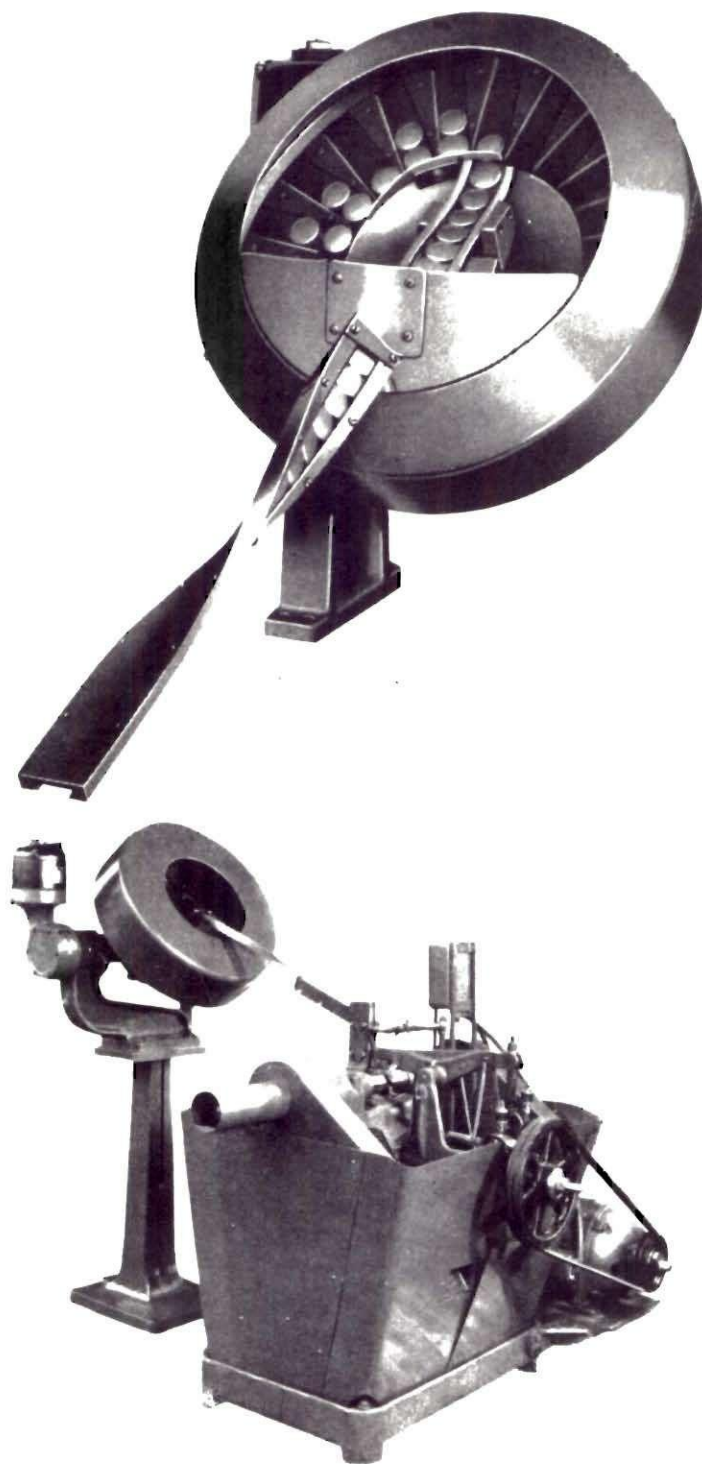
Illustration of a bowl feeder. Upper photograph shows details of a feeder, and lower picture demonstrates the feeder supplying a chamfering machine. (Photograph courtesy of Detroit Power Screwdriver Co.)
